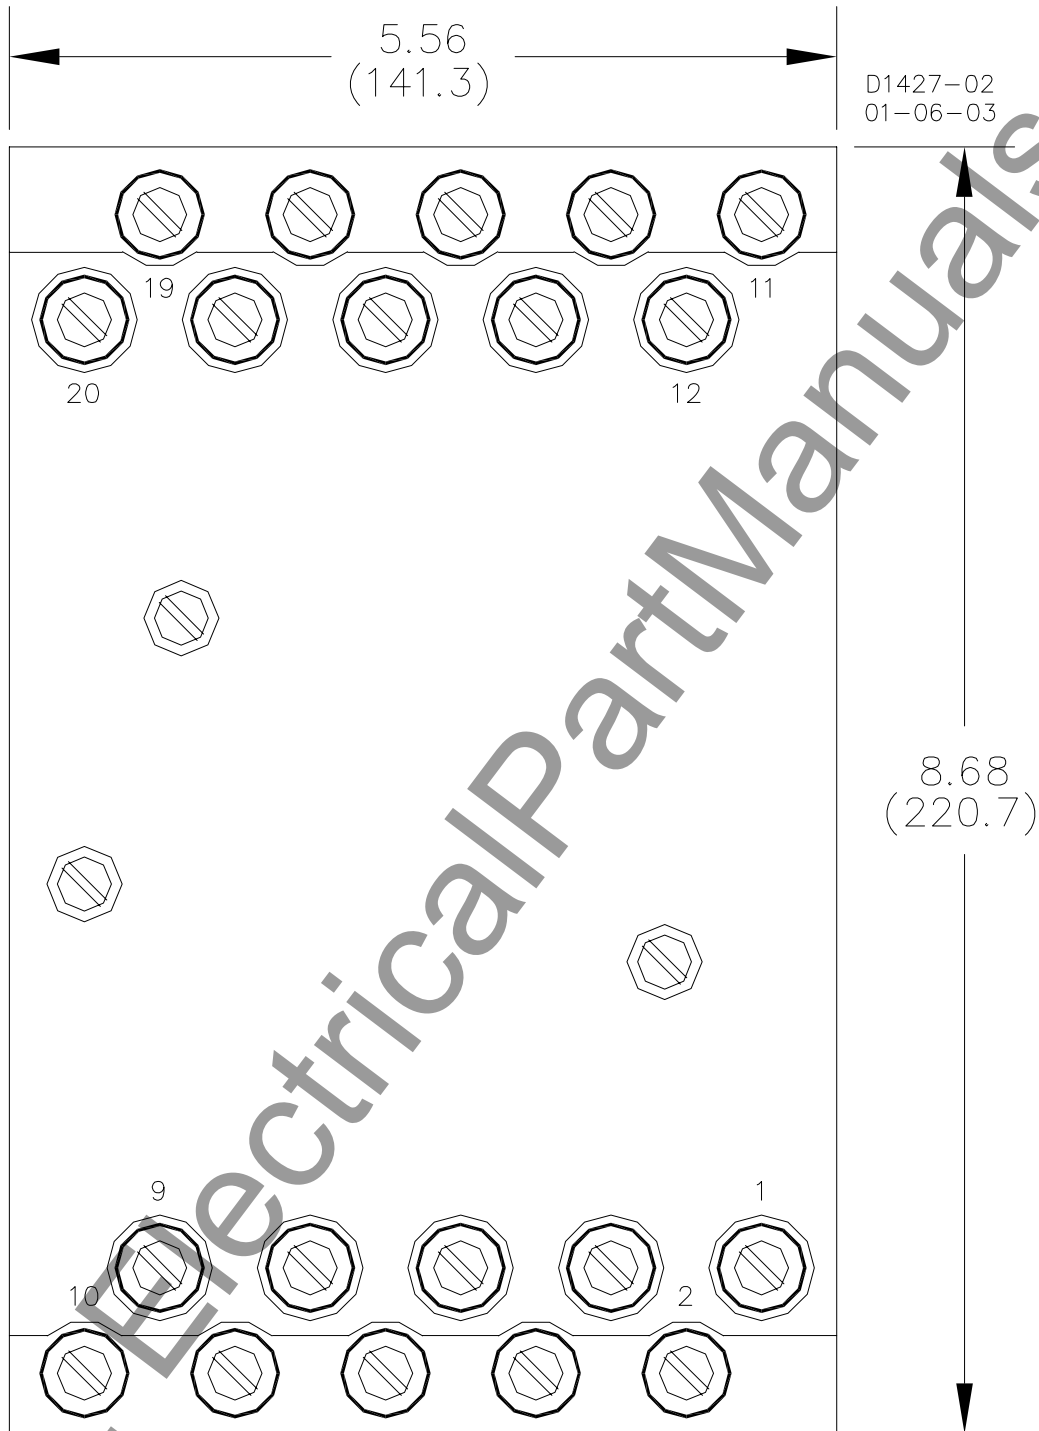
Case Dimensions, Rear View, Projection-Mount Case
